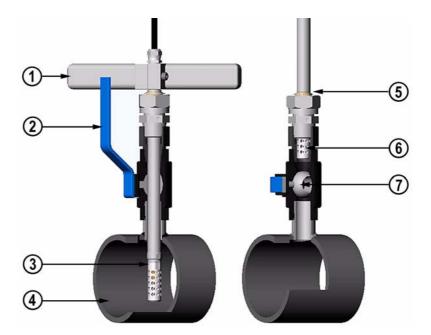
Installing the HMP368 Probe Through a Ball Valve Assembly
